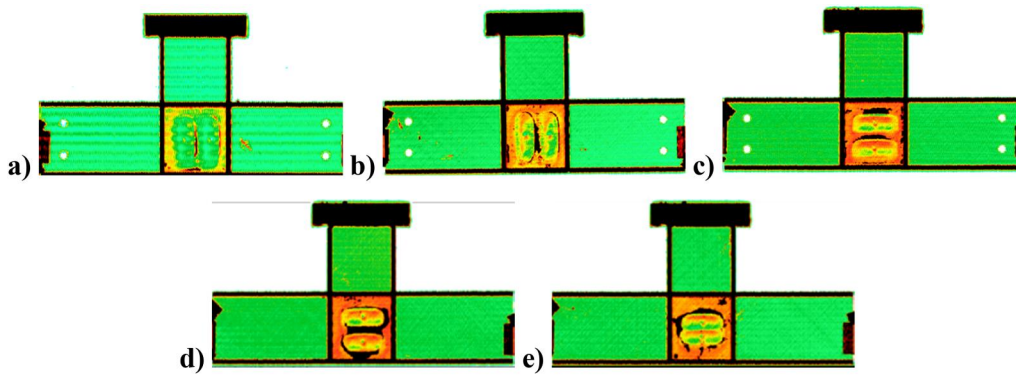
Ultrasonic C-scans of specimens before testing: (a) specimen 1; (b) specimen 2; (c) specimen 3; (d) specimen 4; (e) specimen 5.
